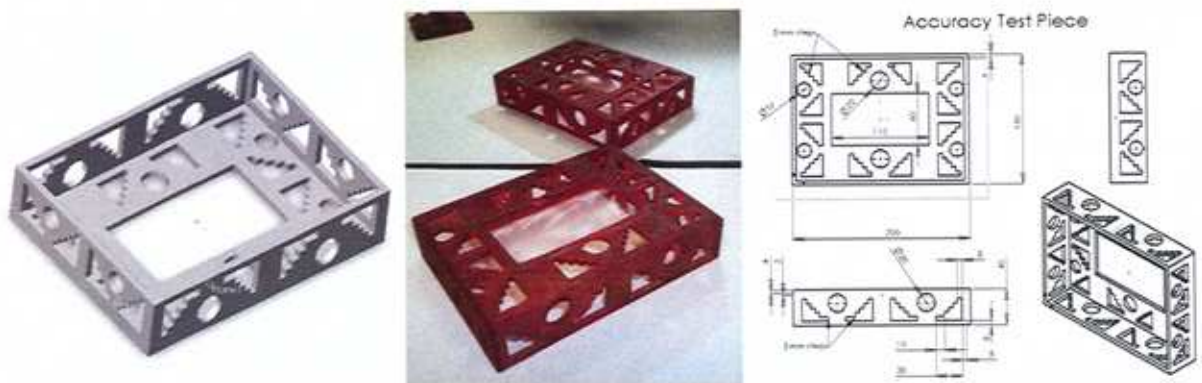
Dimensional Accuracy Test Pieces Figure 3.6.2.2 - Dimensional checks
